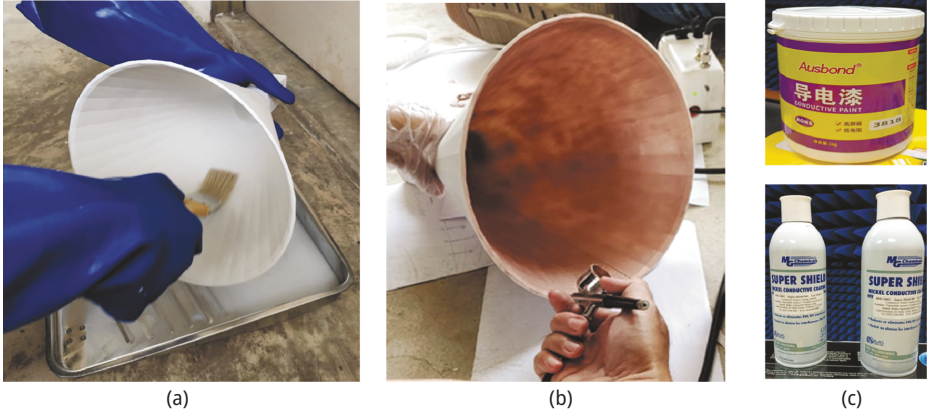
(a) Smooth inner surface of printed horn; (b) spray conductive paint on the inner surface of the horn; and (c) copper and nickel conductive paints.
